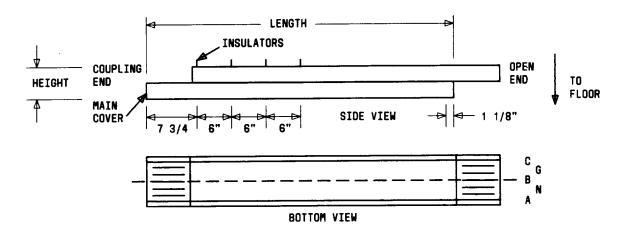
KS-21861 and KS-21862 Feeder Bus Ducts
